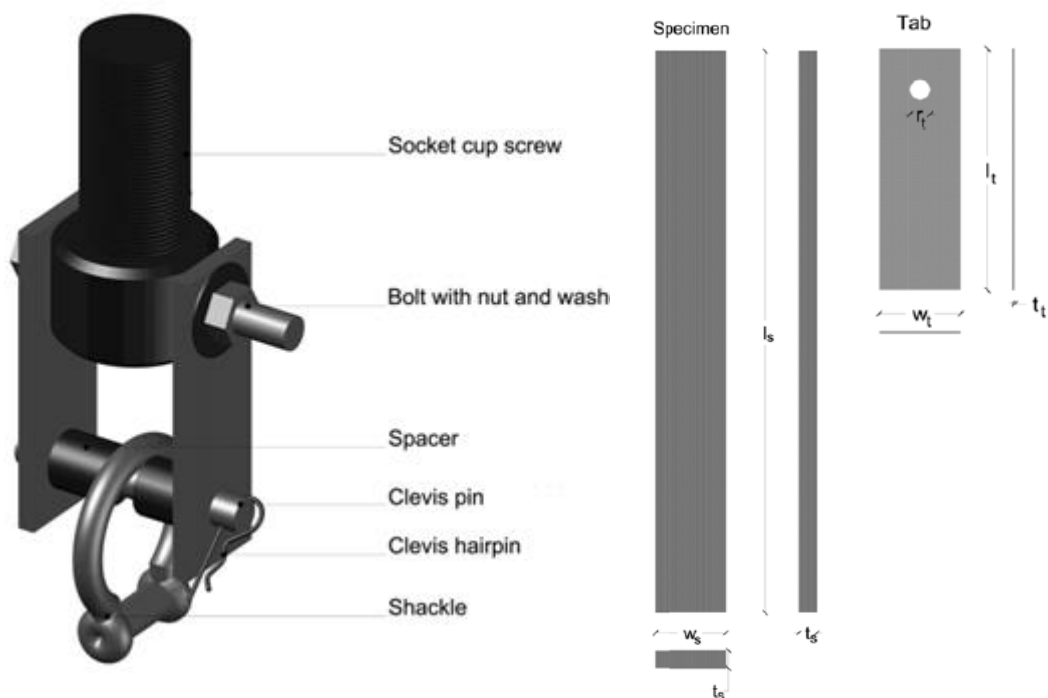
Gripping mechanism and typical specimen dimensions [AC434]
